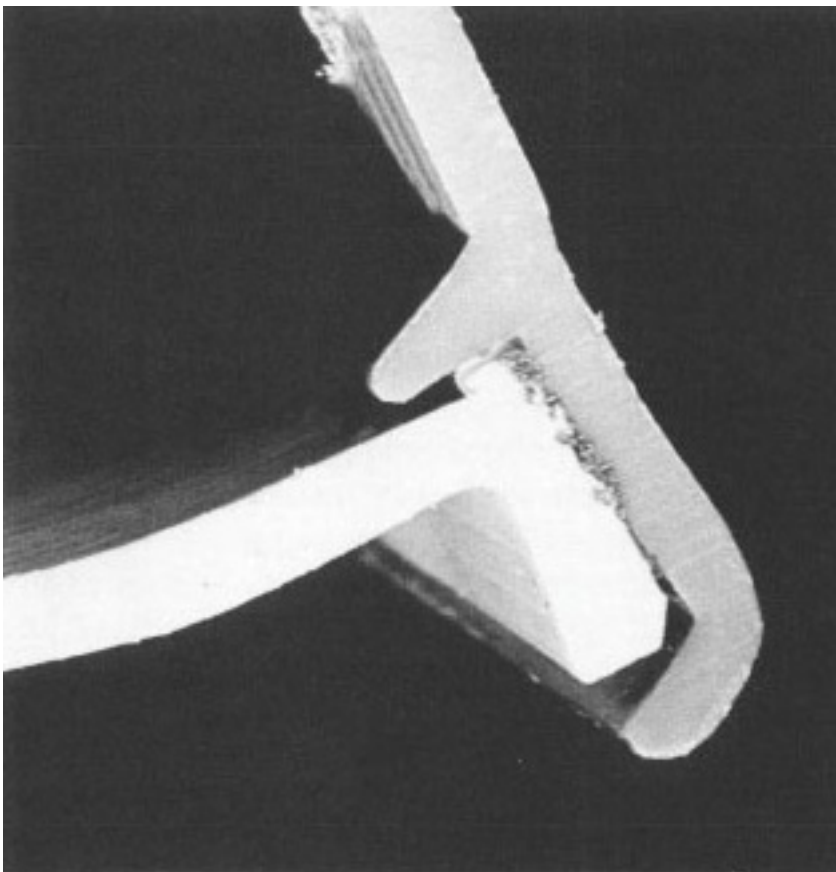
A section through the hull-deck weld showing how the flange on the hull section
